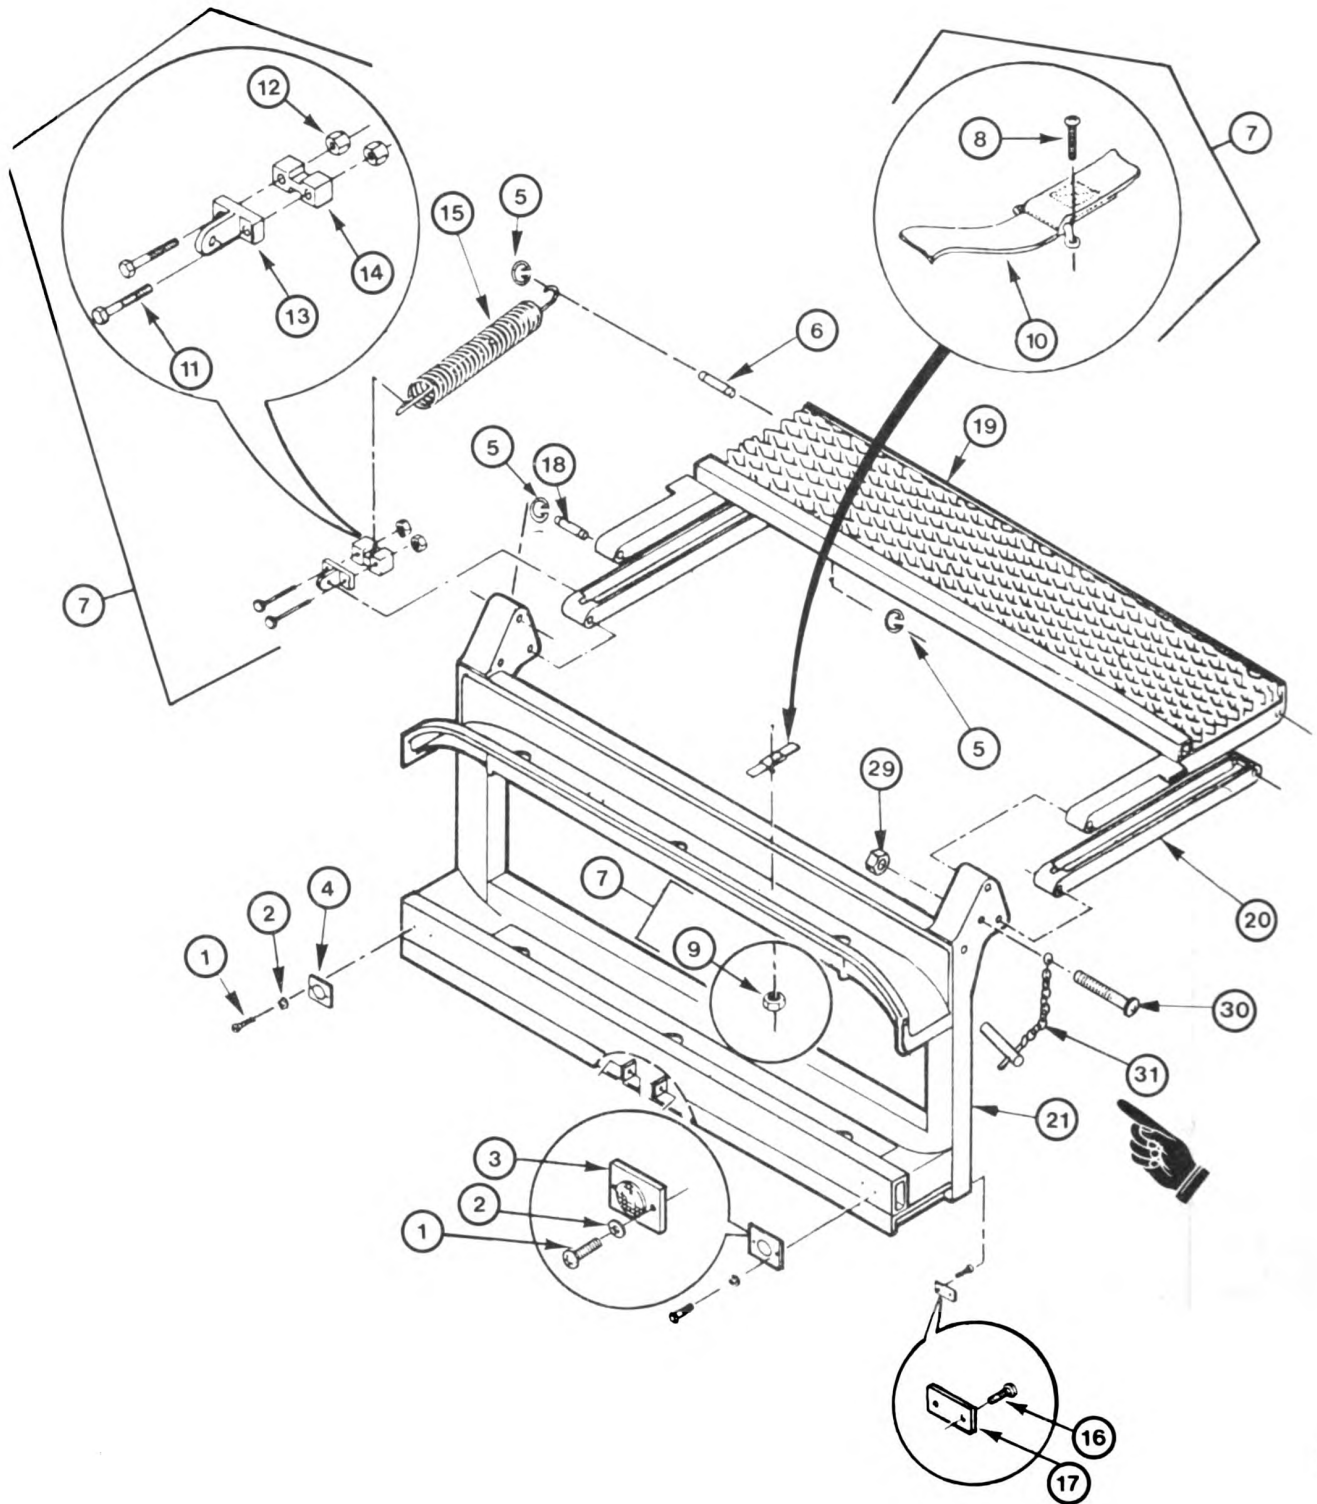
Cable Storage Rack Assembly (Sheet 1 of 2)
